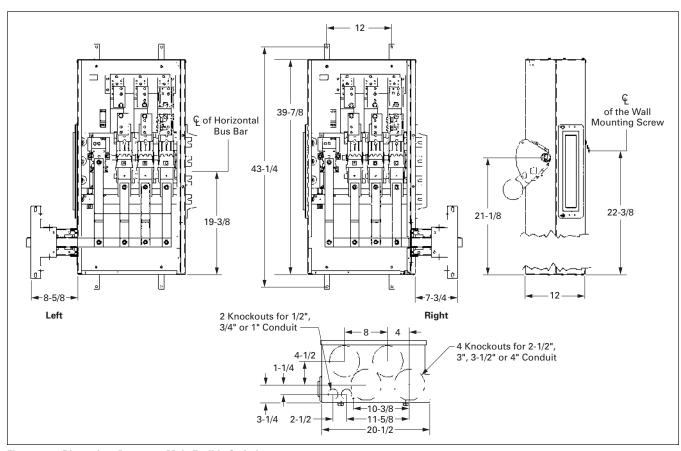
Dimensions/Layout — Main Fusible Switch
